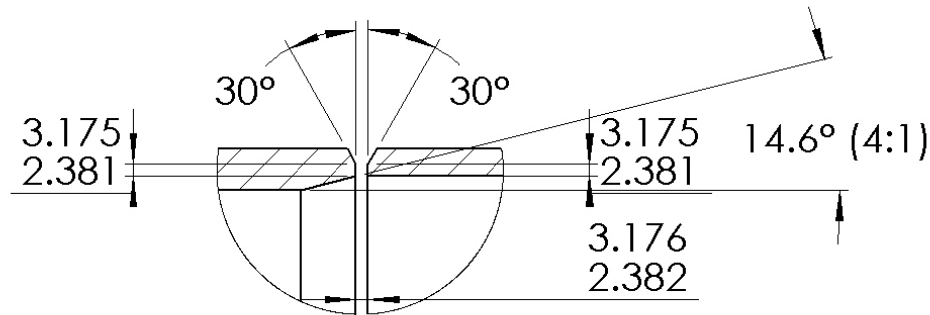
6.35 mm-to-9.53 mm (0.25 inch-to-0.375 inch) Wall Thickness Step with Bevel (Dimensions in mm)
